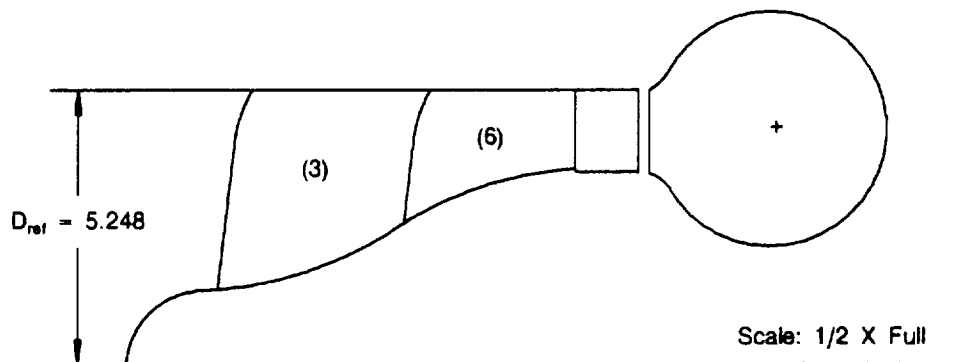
STBE Unique Gas Generator Two-Stage Fuel Pump With Jet Boost Pump and a Single Discharge Volute
